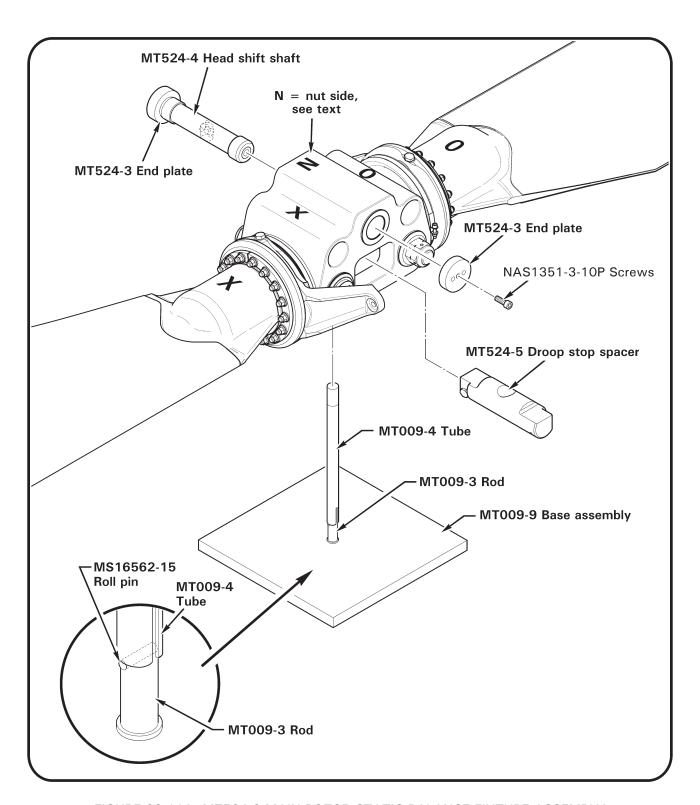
A MT524-2 MAIN ROTOR STATIC BALANCE FIXTURE ASSEMBLY
